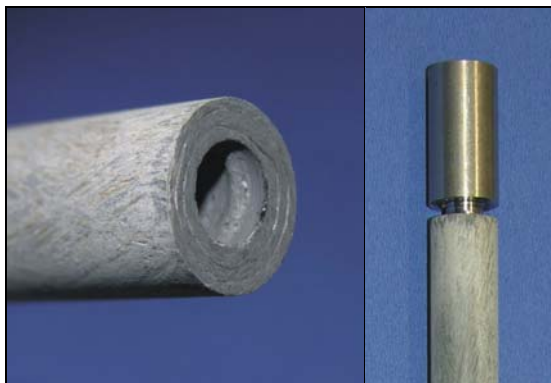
C/SiC piston rod with internal round thread (left) and integrated metallic adapter (right)
